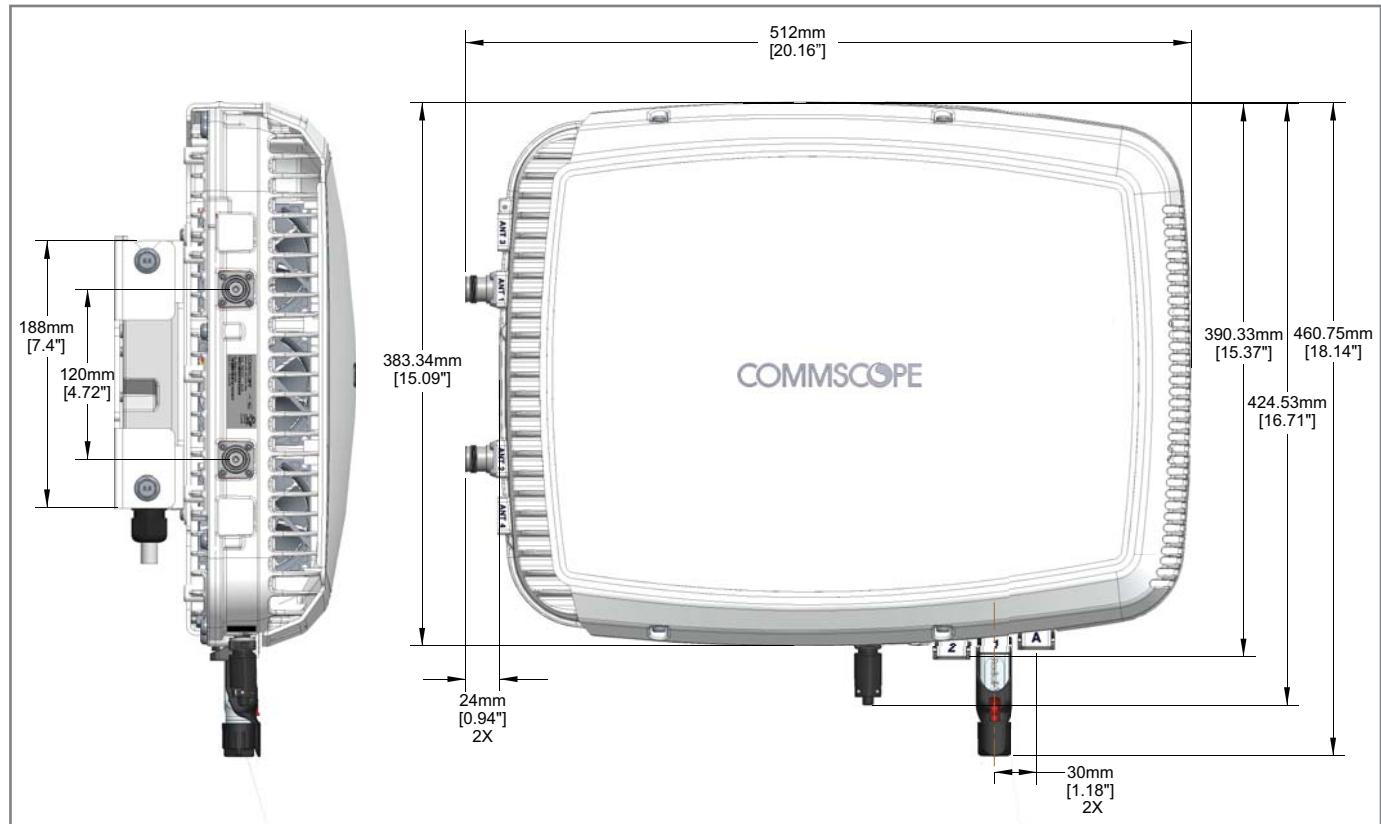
Mounting Dimensions for a CAP L Mounted with the CAP L Hybrid Fiber Splice Box Kit
